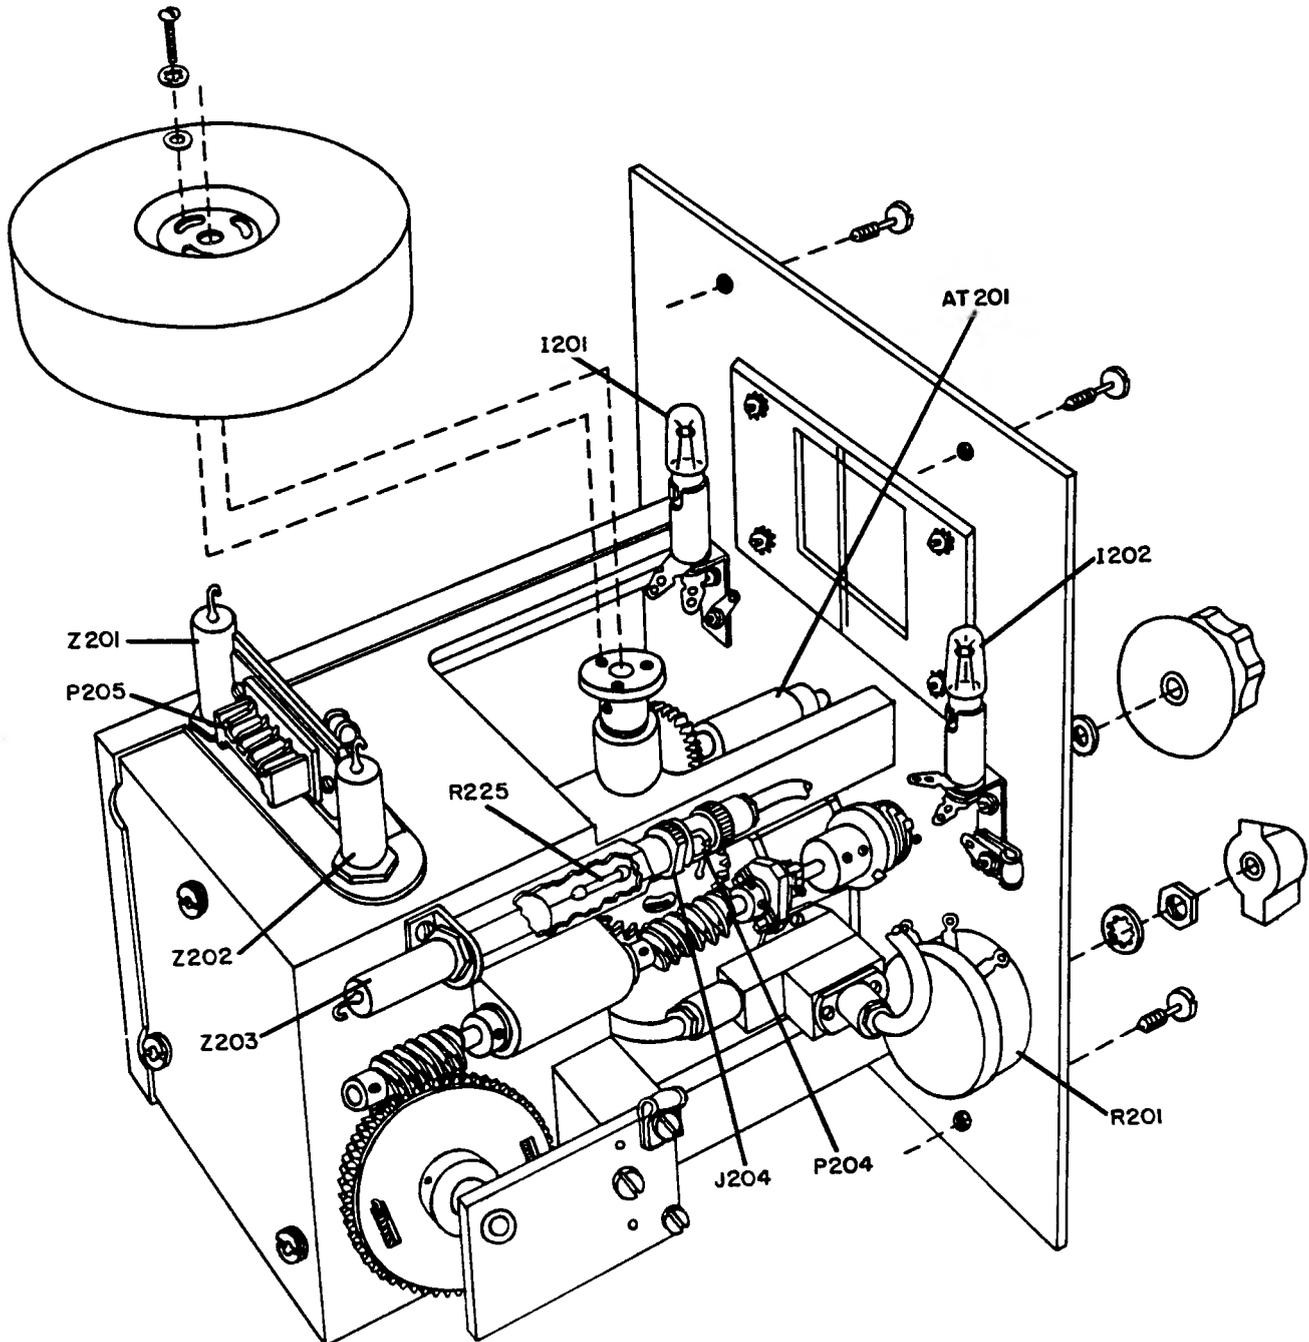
Signal Generator SG-33/TRM-1, Exploded View, Left Side
